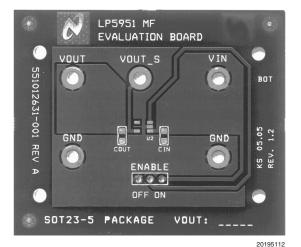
BOTTOM Side, SOT23-5 Package (MF)
